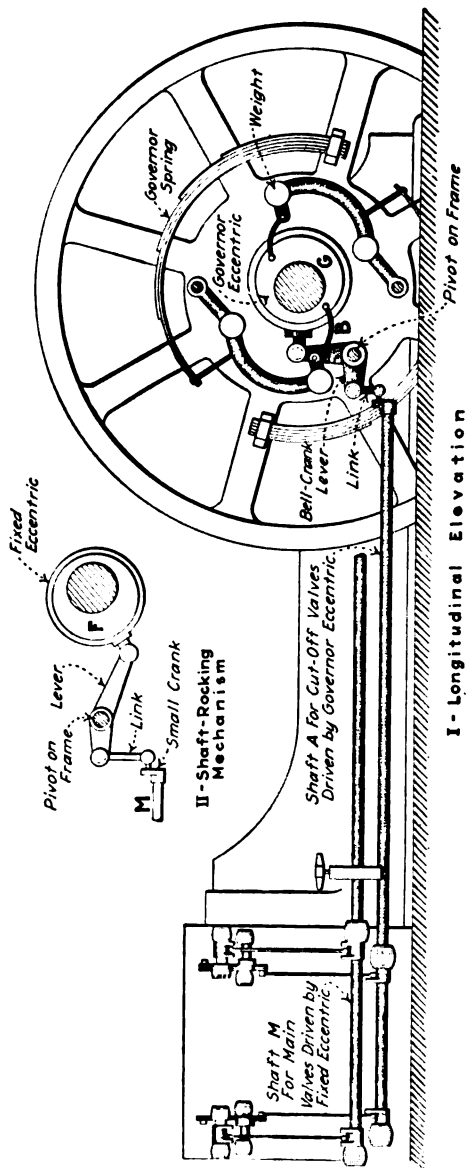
Side view of McIntosh & Seymour engine showing complete valve-operating mechanism.
